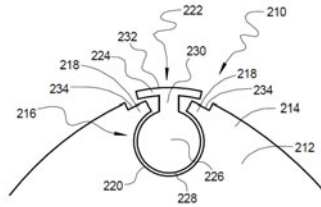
self-positioning mechanical sealing element. Where: 232 – contact surface; 212 – piston; 224 – sealing crown; 234 – arresting notch guarantees continuous piston surface at extreme positions; 226 – rocking element; 230 – neck supporting sealing crown; 216 – channel for rocking element (with lubrication source - not shown); 220 and 228 – contact surfaces; elastic elements required to compensate for thermal expansion not shown.
